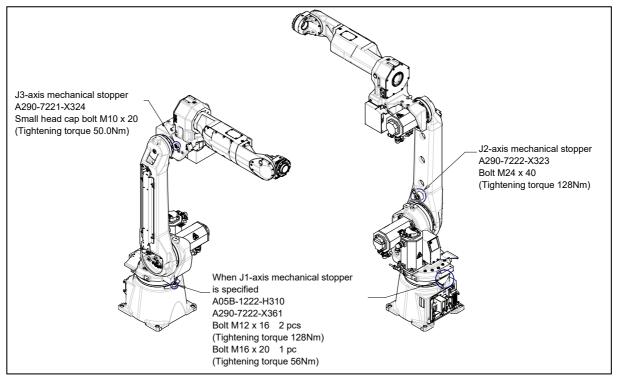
(a) Check of mechanical stopper and adjustable mechanical stopper
